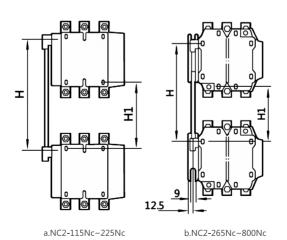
Outline and installation drawing of NC2-115Nc~800Nc
